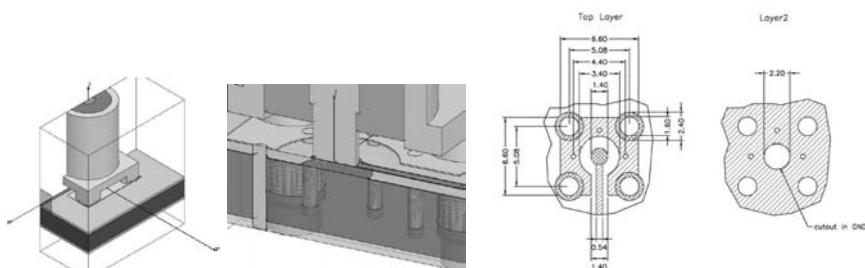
Example of an optimized footprint for a microstrip transition to a surface mounted SMA connector (courtesy of Rosenberger).
